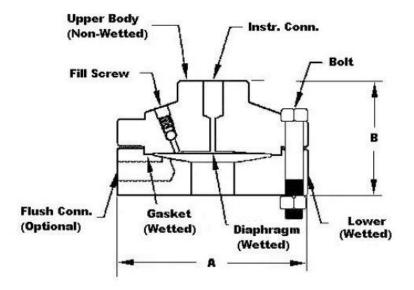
Seal Dimensions (Threaded Process Connection Seals)
